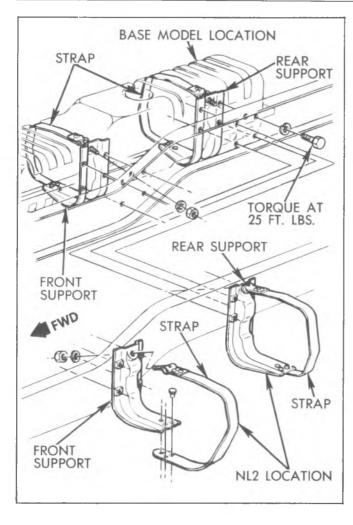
C-62-Fuel Tank Mounting-Cab and Crewcab
